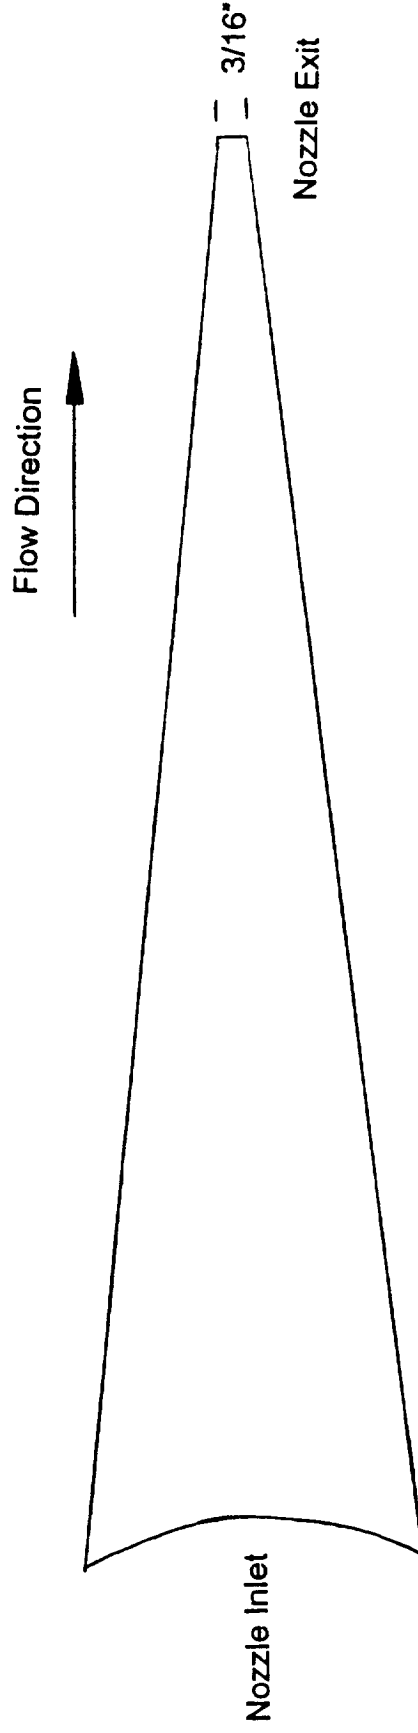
A. Redesigned Eight Inch Nozzle, Side View
